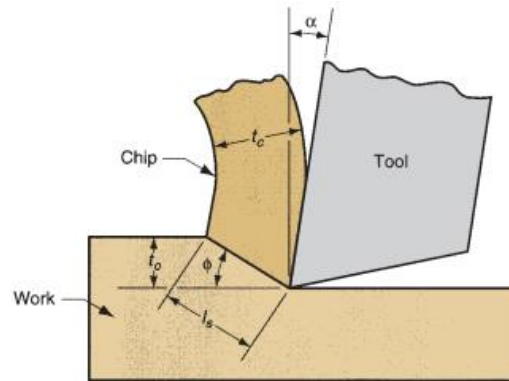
Shear deformation of the material by the cutting tool to form chips [17]
